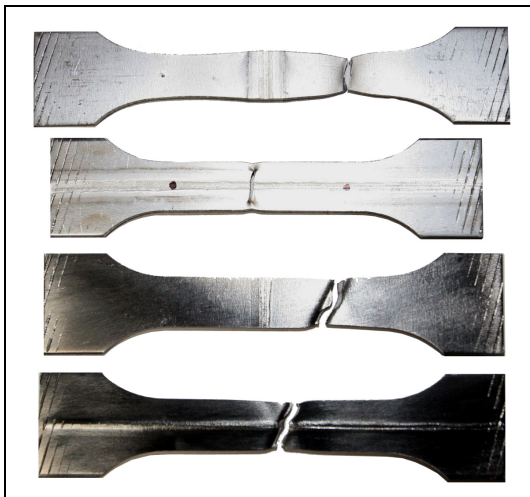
Typical tensile-test weld specimen fracture locations. From top: Transverse (T), annealed base metal; Longitudinal (L), annealed base metal; T, post-weld C.C. & Q+T; L, post-weld C.C. & Q+T.
